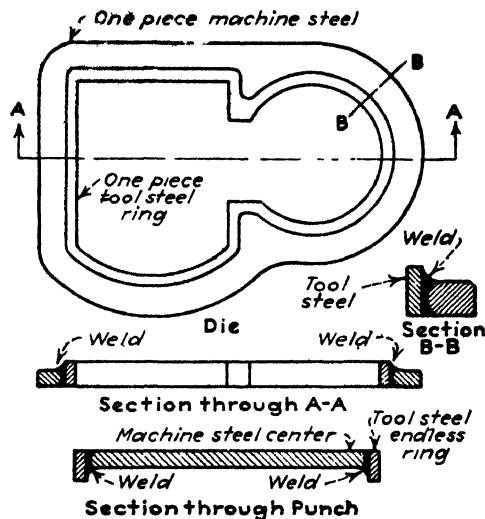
Both punch and die are fabricated from machine steel with welded tool-steel rings at the working faces.
